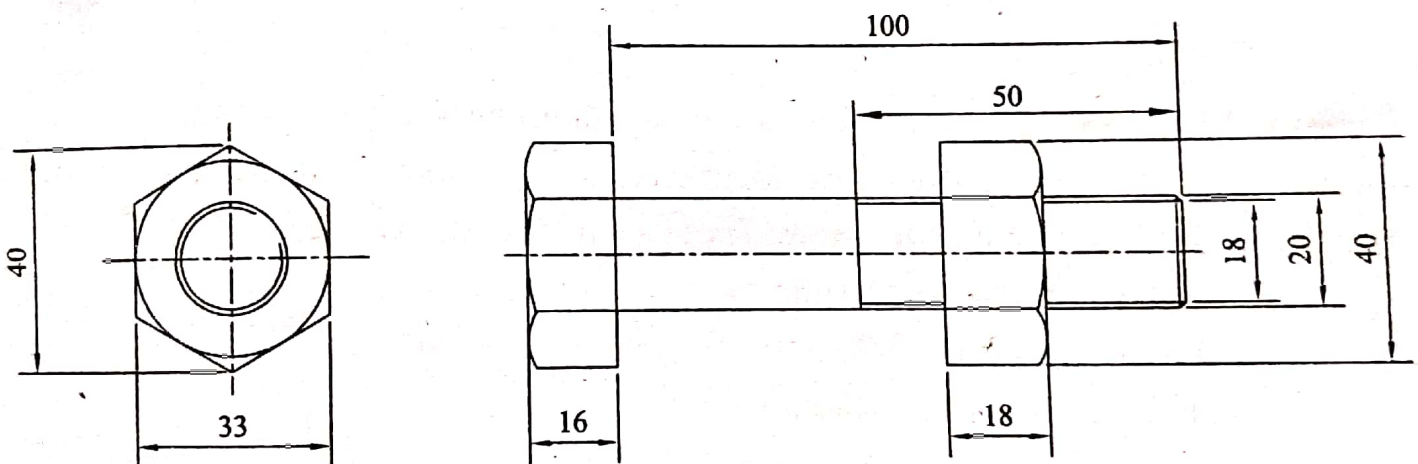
Front and side view of a hexagonal headed bolt across flats
